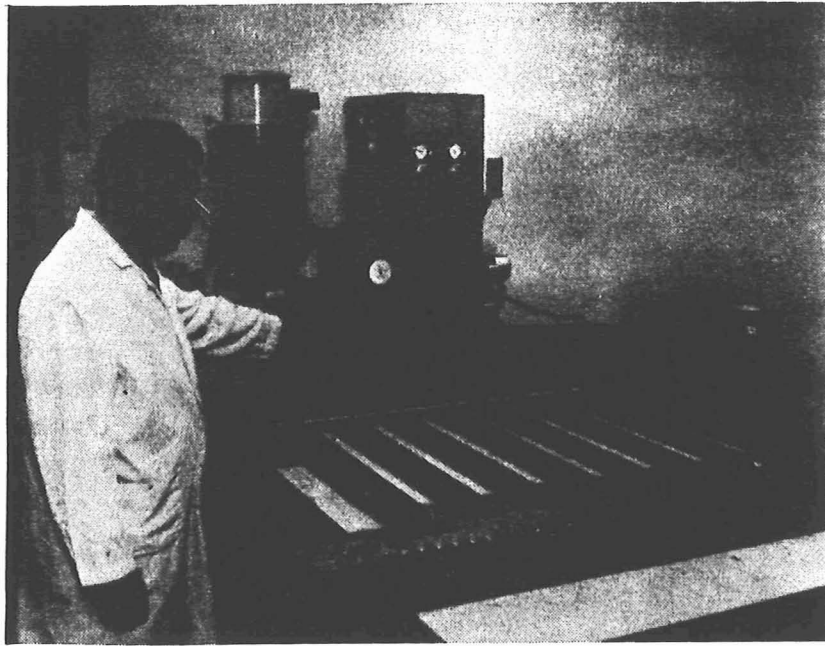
Final Drilling of the Stiffened Panel (128748B)
